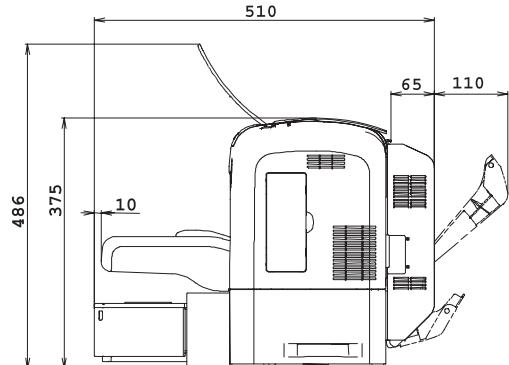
Right Side View with Lower Cassette and Duplex Unit installed
